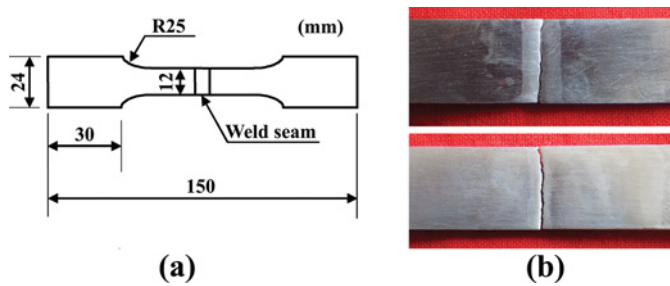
Geometry of standard tensile specimen (a) and tensile specimen ( $v = 6,000$  mm/min) after testing (b) (color figure available online).
